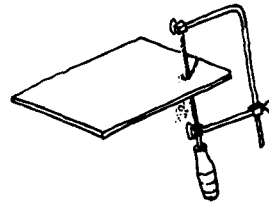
In the macroscopic world, one can cut an arbitrary shape out of a piece of smooth material.
